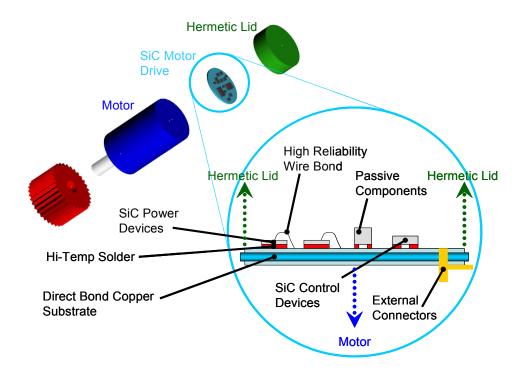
Conceptual illustration of an integrated SiC motor drive and DC machine.
